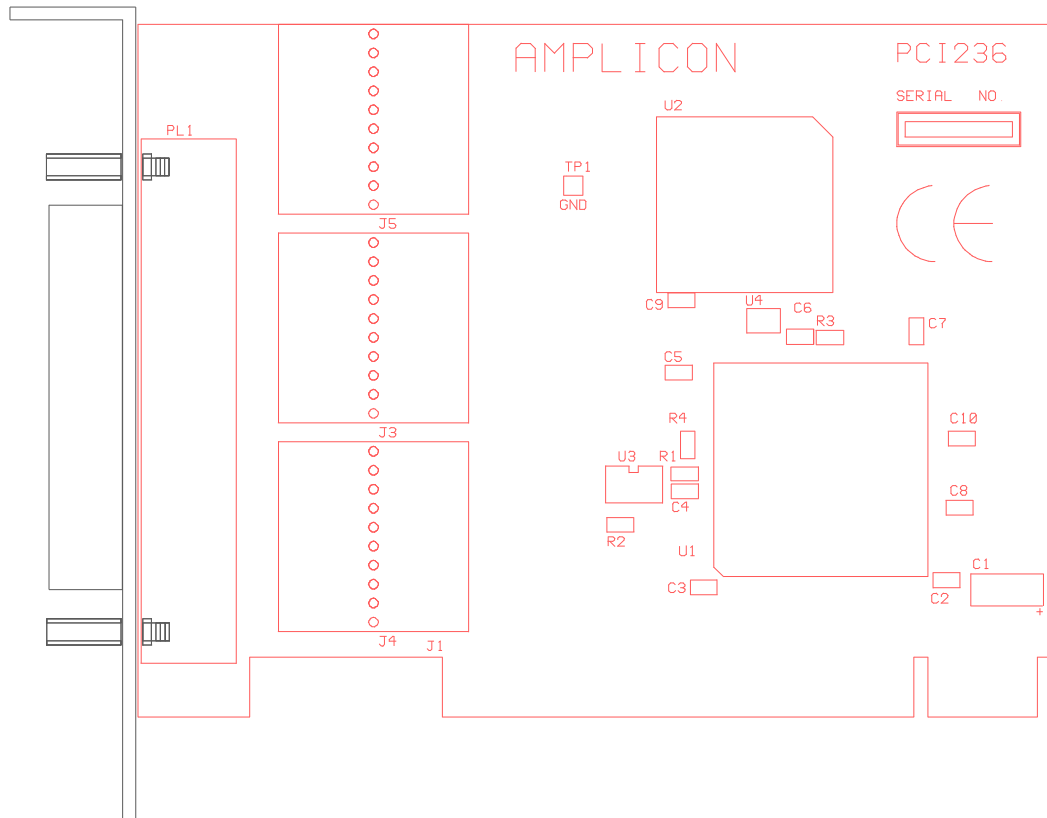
PRINTED CIRCUIT LAYOUT
